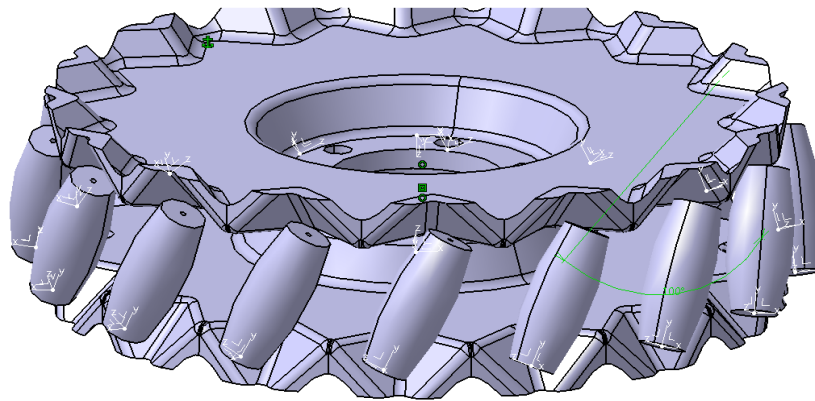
Mecanum Wheel Design 1 Designed in CATIA Using GSD Workbench
